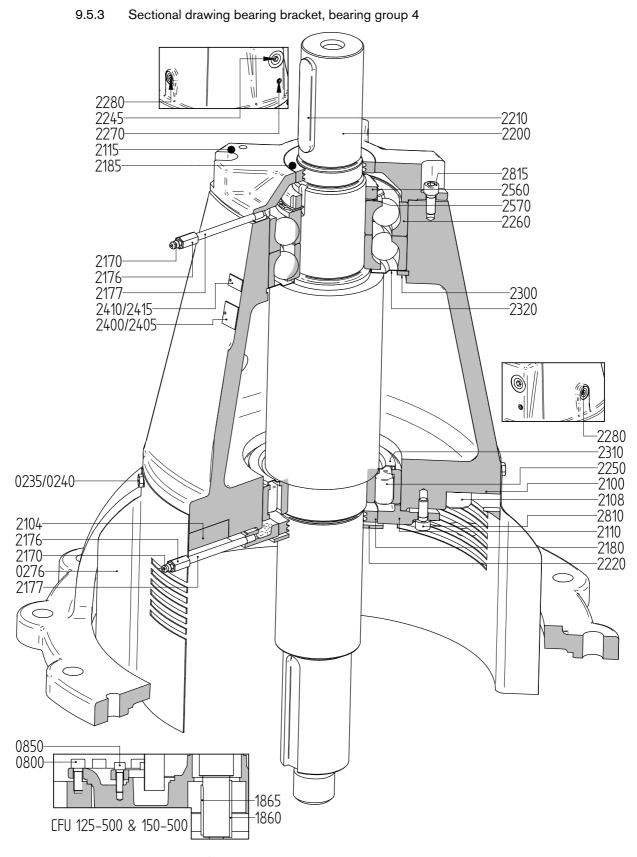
Sectional drawing bearing bracket, bearing group 4.
